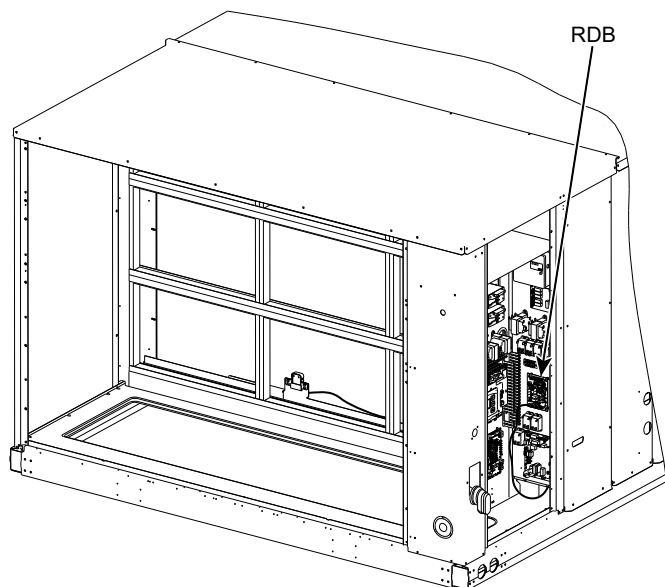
Location of Refrigerant Dissipation Board (RDB) (Shown with Control Box Cover Removed)
